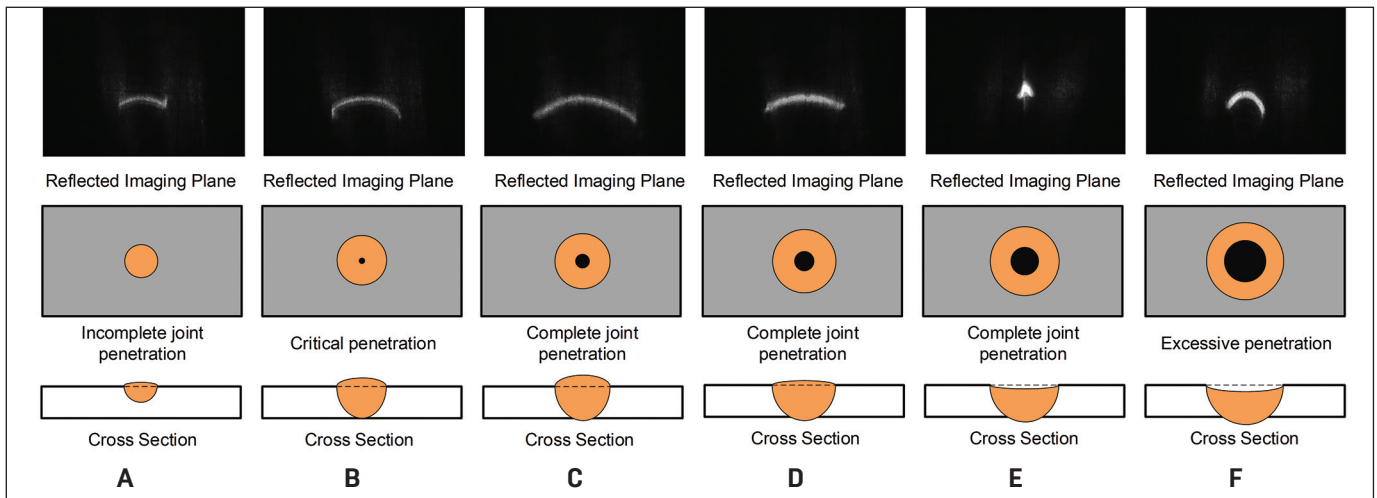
Dynamic penetration in the GTAW process (the single-stripe shape in different penetrations): A — Incomplete joint penetration; B — critical penetration; C, D, E — complete joint penetration; F — excessive penetration.
